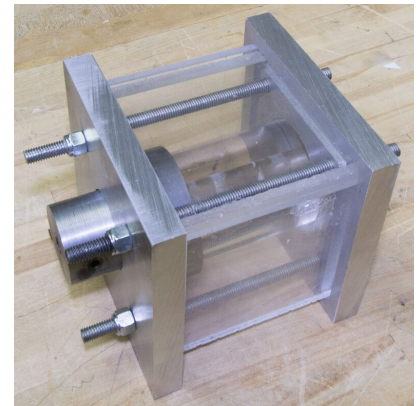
Fully Assembled Finished Design. Every component is integrated together into a sleek compact design.
